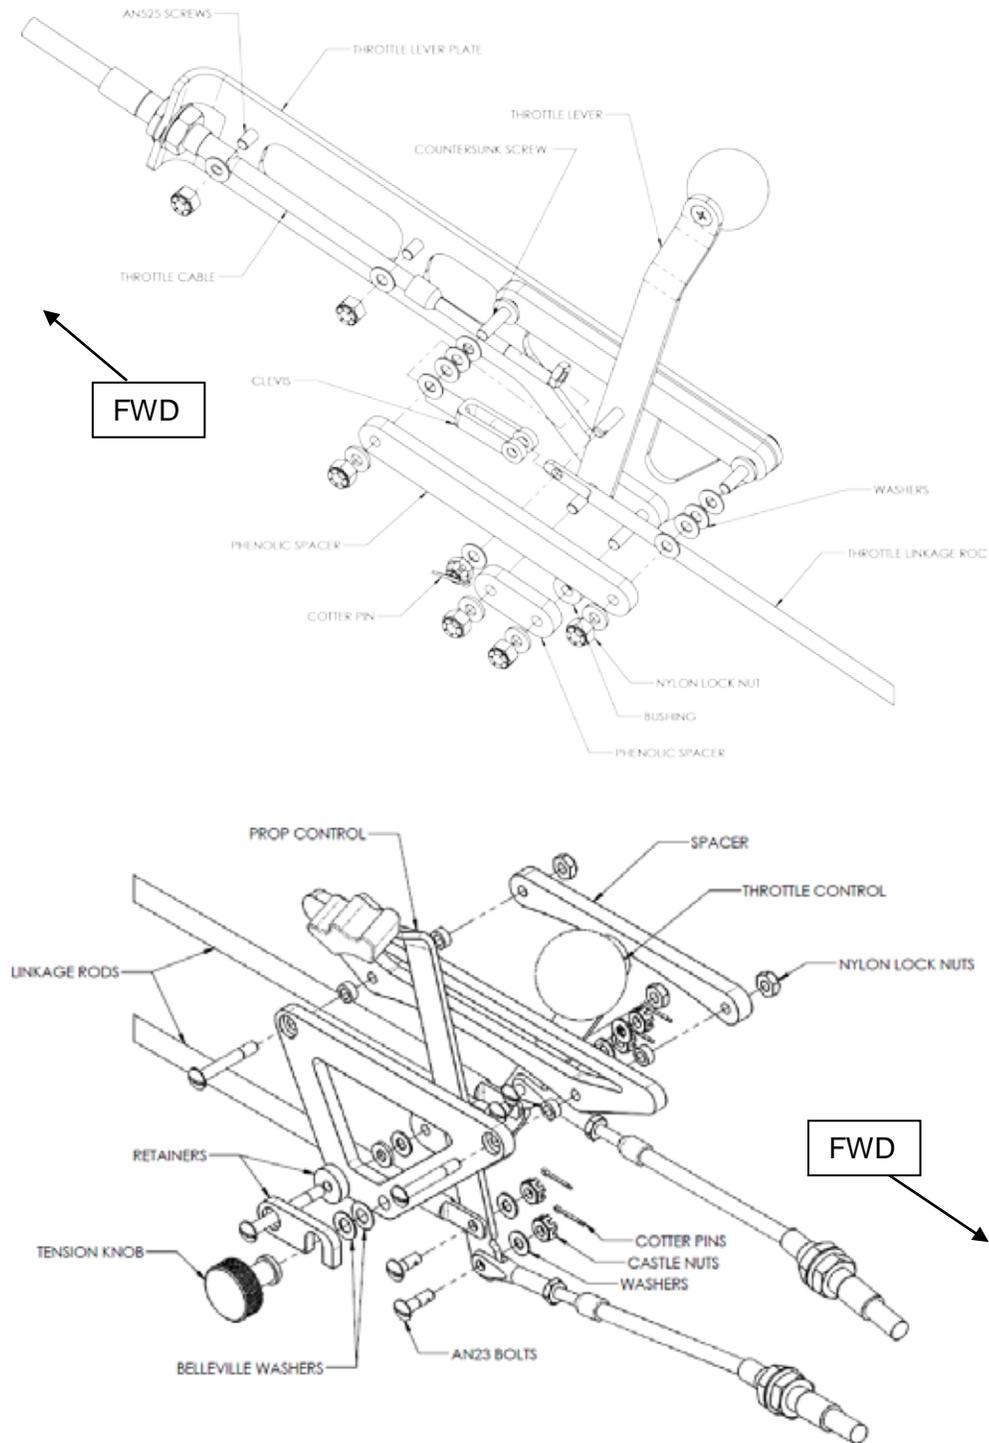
Throttle Installation, CCK/CCX-1865 & CCK/CCX-2000 (Forward Throttle Shown)
